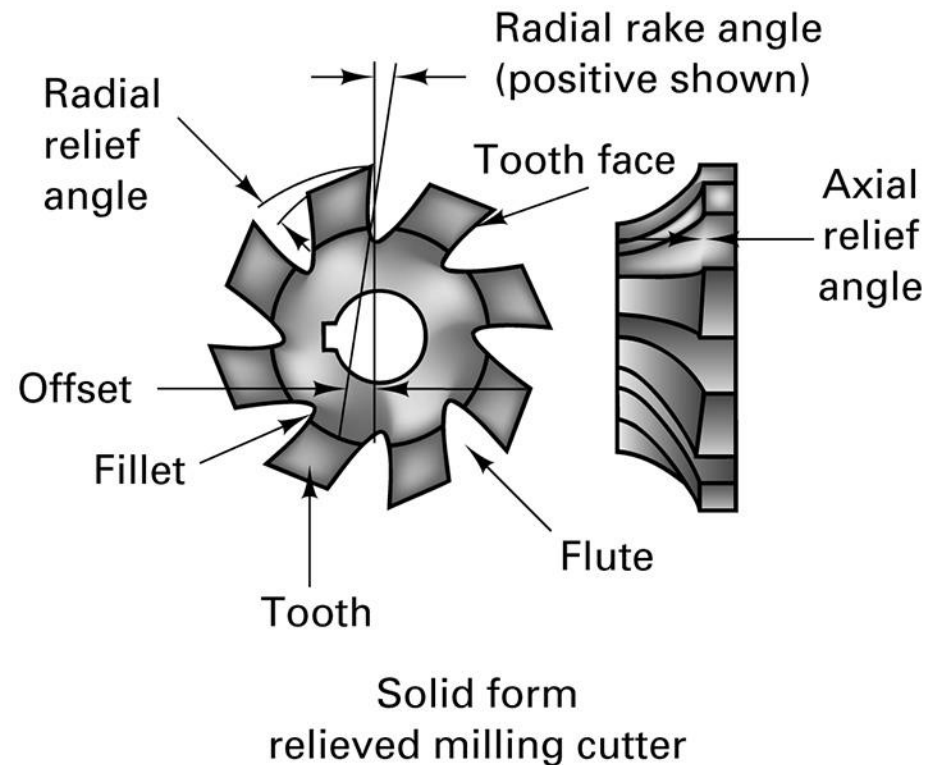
Solid form relieved milling cutter, would be mounted on an arbor in a horizontal milling machine..
